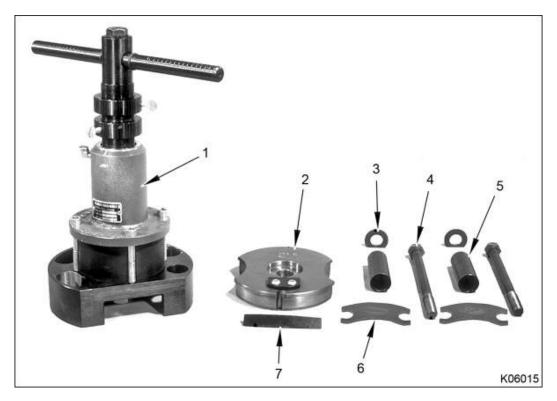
Cylinder Sleeve Counterbore Tool Kit
